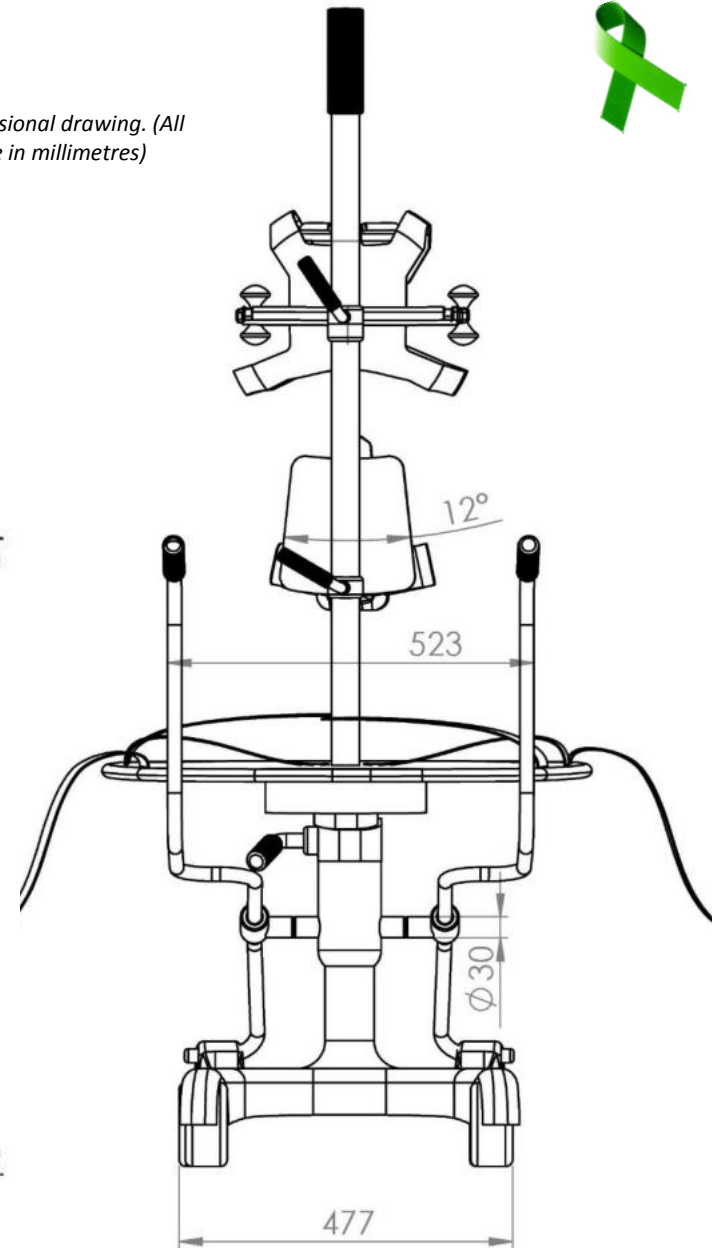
the dimensional drawing. (All dimensions are in millimetres)
